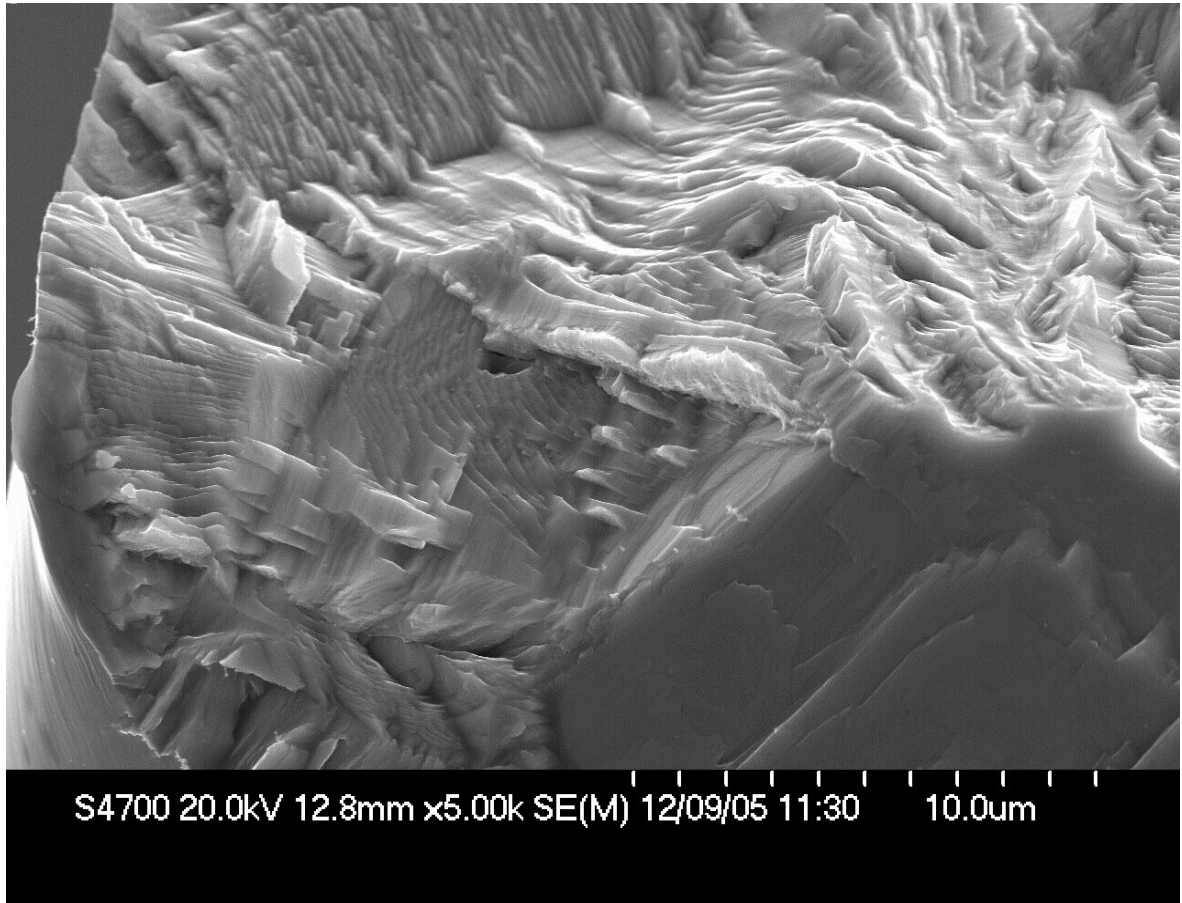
CII_20_150_D2 faceted fracture surface. 150 μ m specimen.
